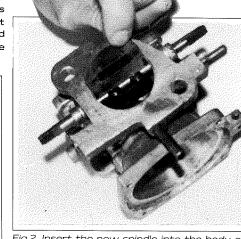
Insert the new spindle into the body of the carburettor and slide the throttle disc in as shown. Note that the recesses for the retaining screw heads should be uppermost.
